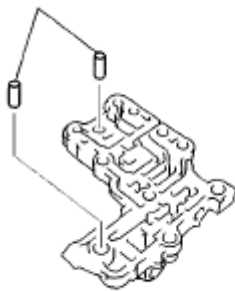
Identifying Secondary Control Valve Body Assembly Components With Torque Specifications
